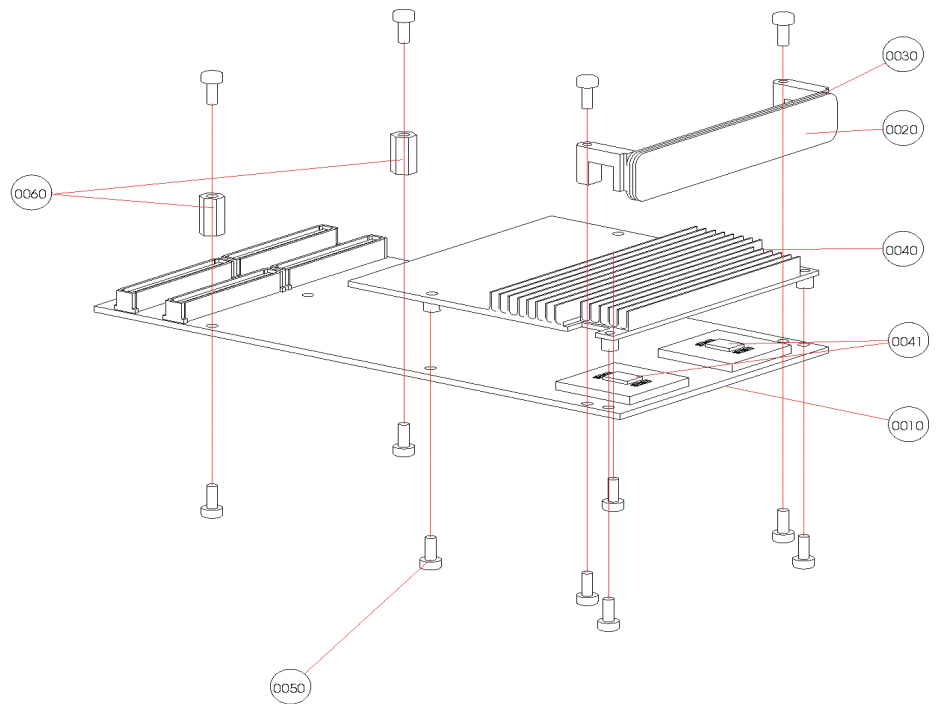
Top Assembly exploded view for 120092 (variants 120093, 120791 and 120673 use the same heat sink)
